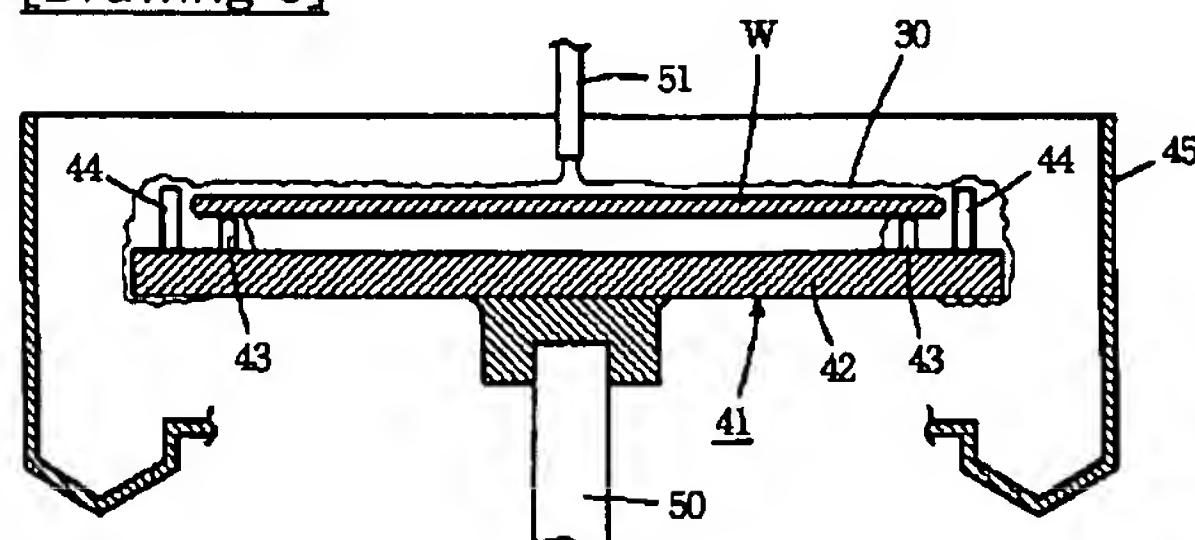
[Drawing 2][Drawing 3]
